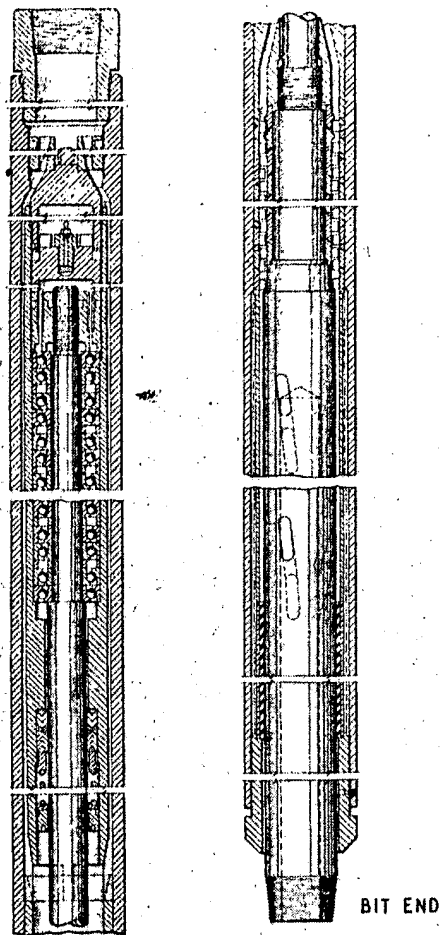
This turbodrill designed by the Engineering Development Company between 1945 and 1950 resembled previous designs and employed the sealed ball thrust bearings.
